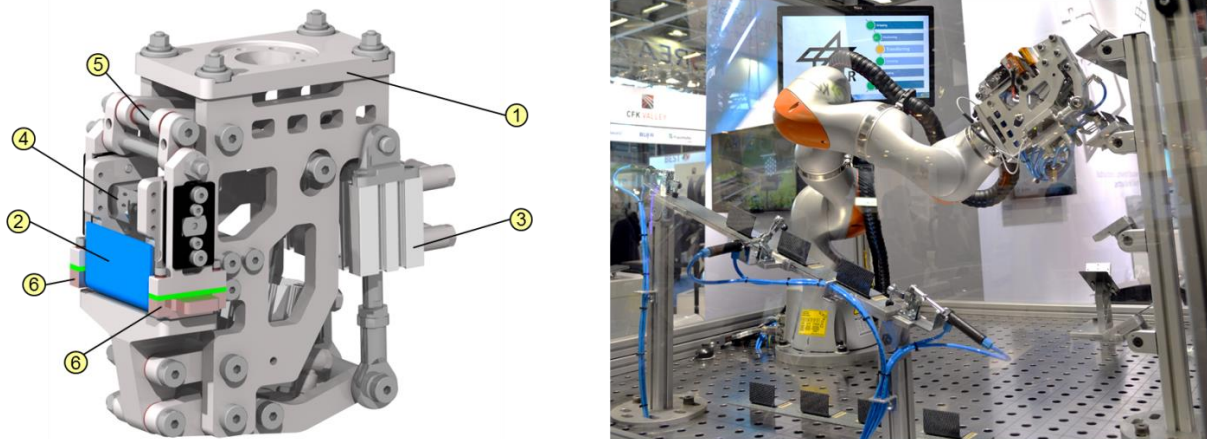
Resistance welding end-effector (left) with (1) robot flange, (2) clip clamping unit, (3) pressure unit, (4) centering unit, (5) contact pressure unit, (6) contact stamp and electrical contact. Automated welding process in a robot cell (right)
